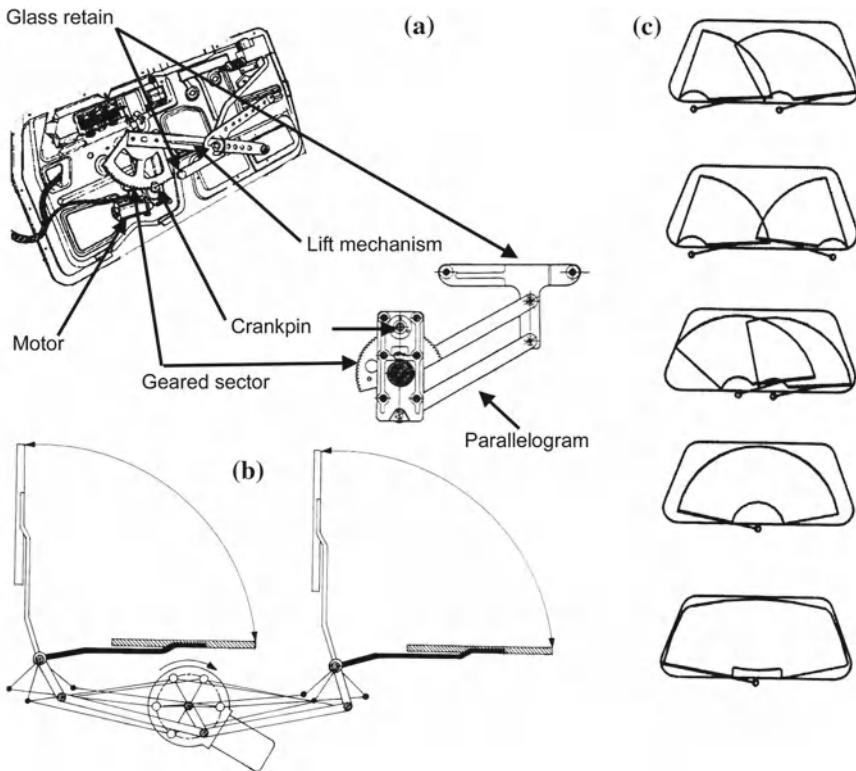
a Inner view of the door with its windows winder. b Windscreen wiper mechanism. c Different wiper configurations
